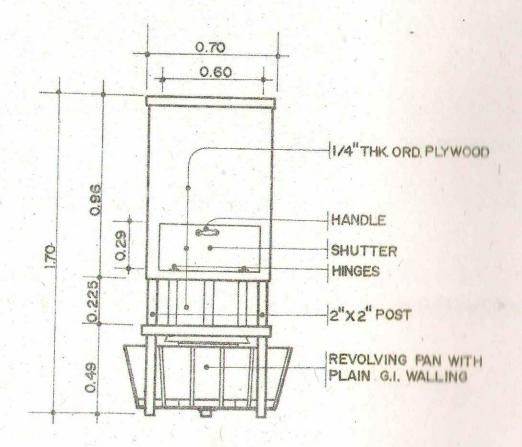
LEFT SIDE ELEVATION Scale: 1:20 meter
